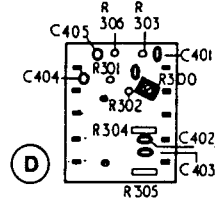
LAYOUT OF RECORDER MATCHING PRINT PANEL.
